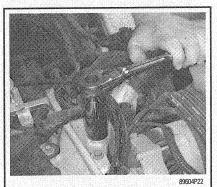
and loosen the sensor using a suitable socket or other drive tool
